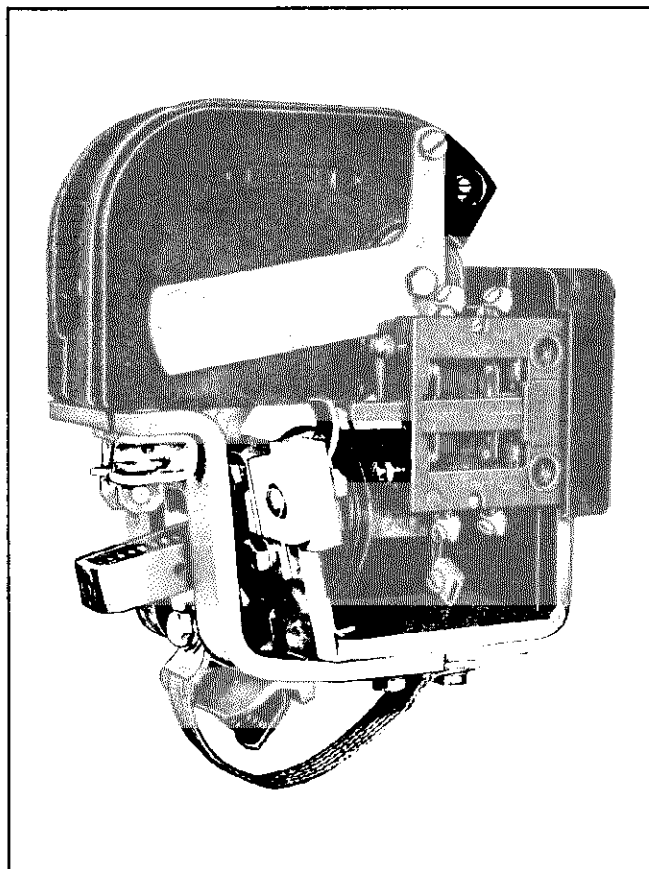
L64 Auxiliary Contact installed on a Type Type MD 510 Contactor
